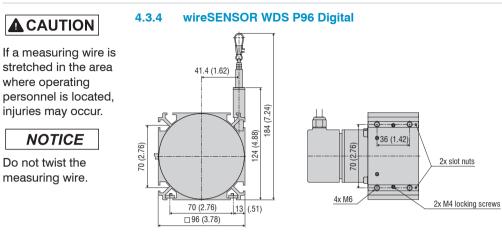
Dimensional drawing WDS- ... - P96 - XX - XXX, dimensions in mm (inches)
